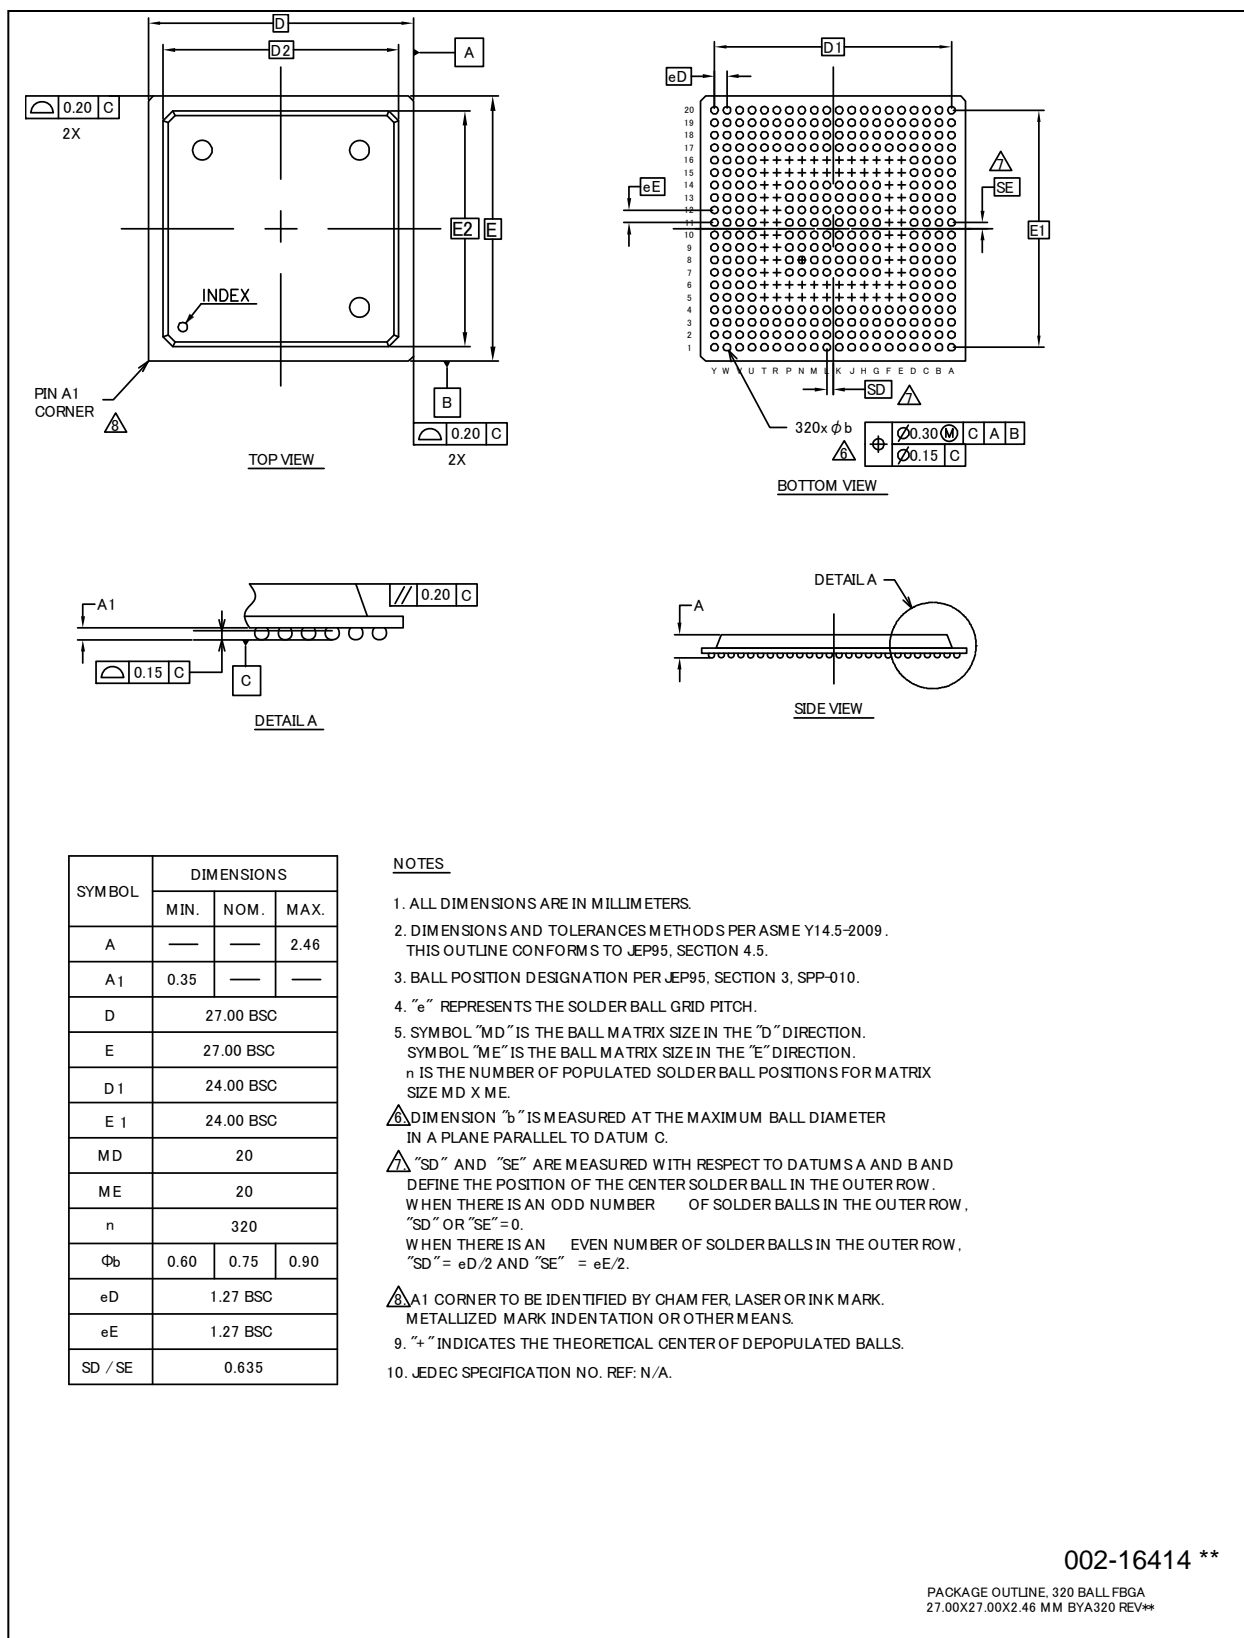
BGA-320 (BYA320) Package Dimensions
